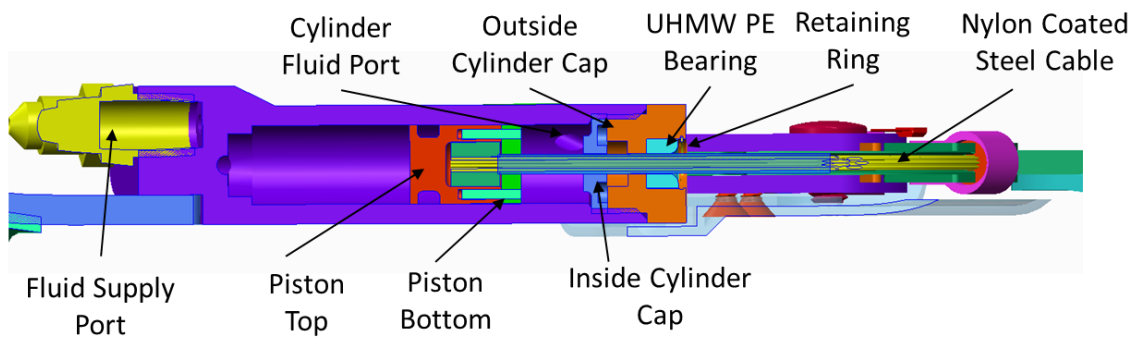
Cross-section of piston cable hydraulic cylinder
